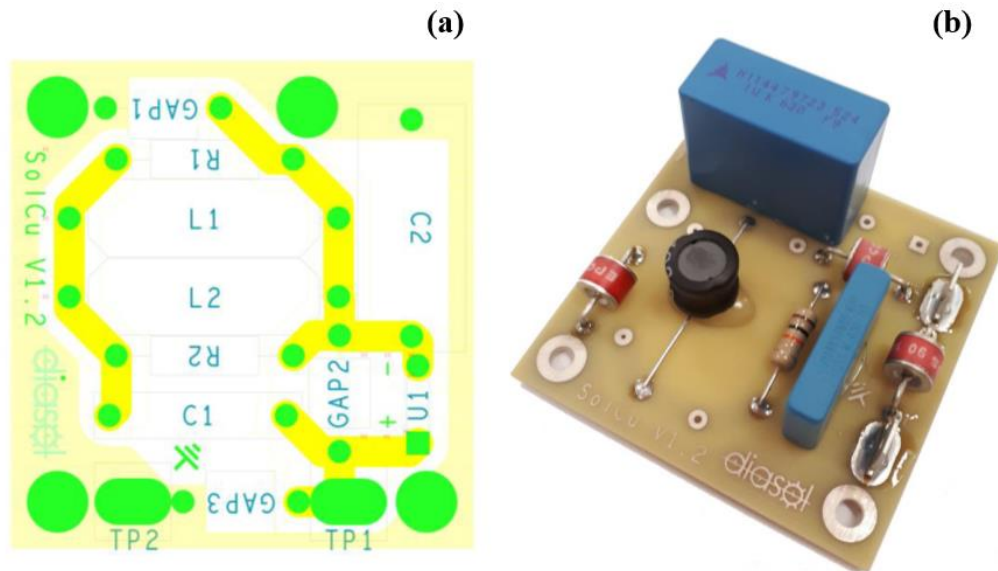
(a) PCB layout and (b) final version for LF Measurement Impedance
